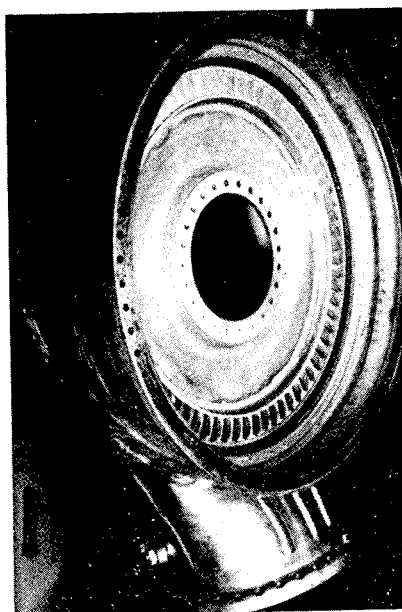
Unitized shroud, casing, and manifold configuration for low inlet pressure.
